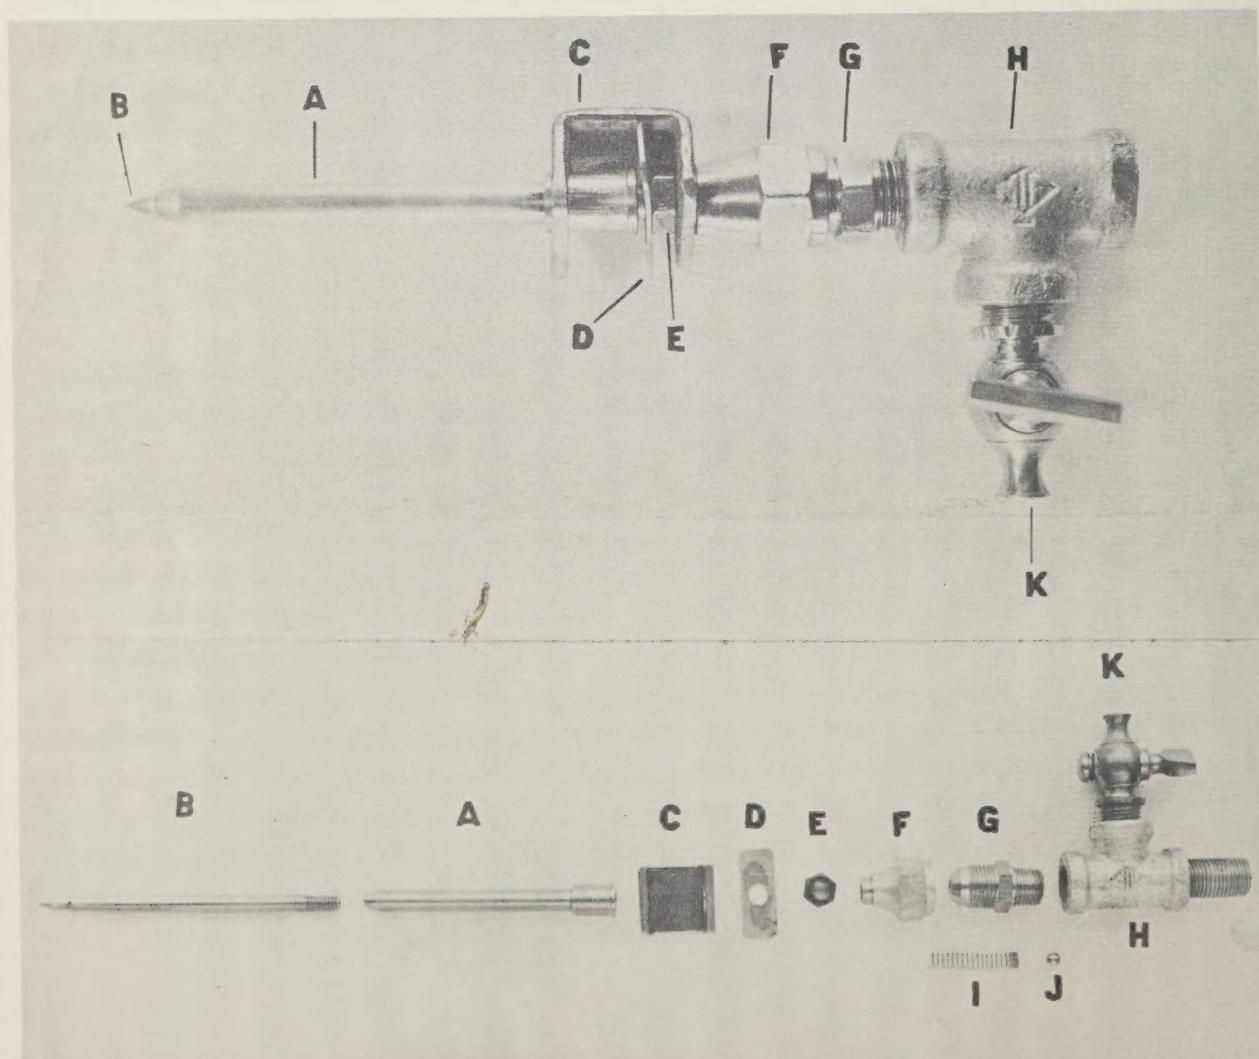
Details of the nozzle. Top, assembled; bottom, disassembled.
